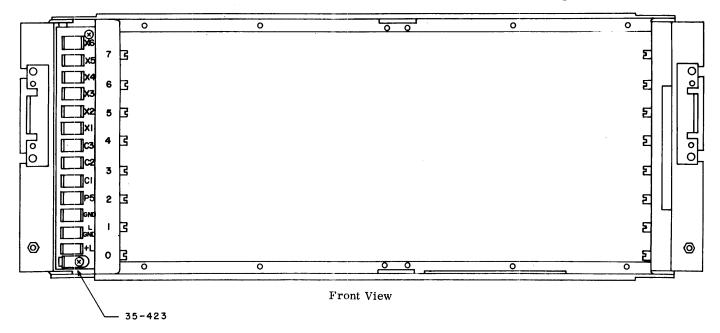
MODEL 50, 60, 70, 80 and 85 CPU Chassis
